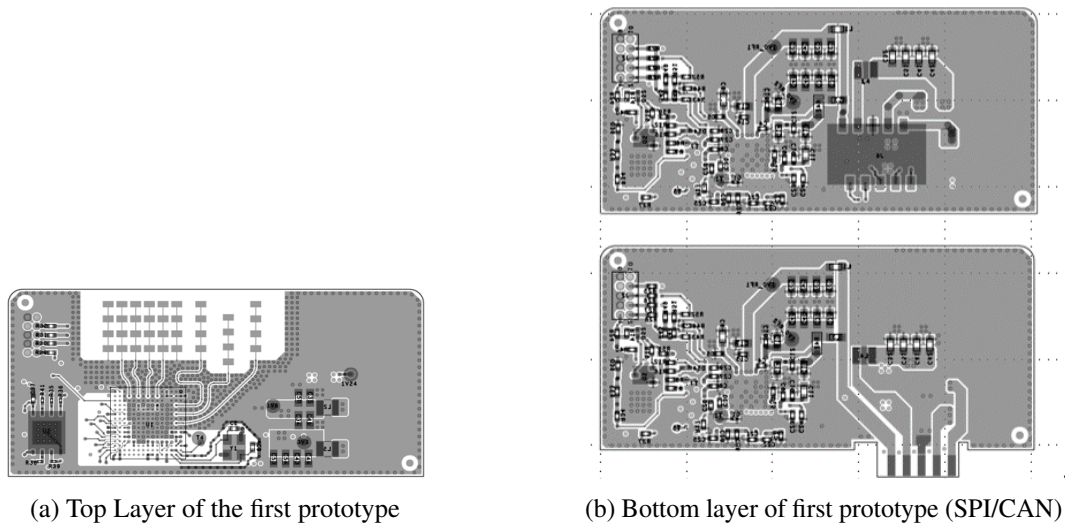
Top and bottom layers of the radar board for the first prototype
